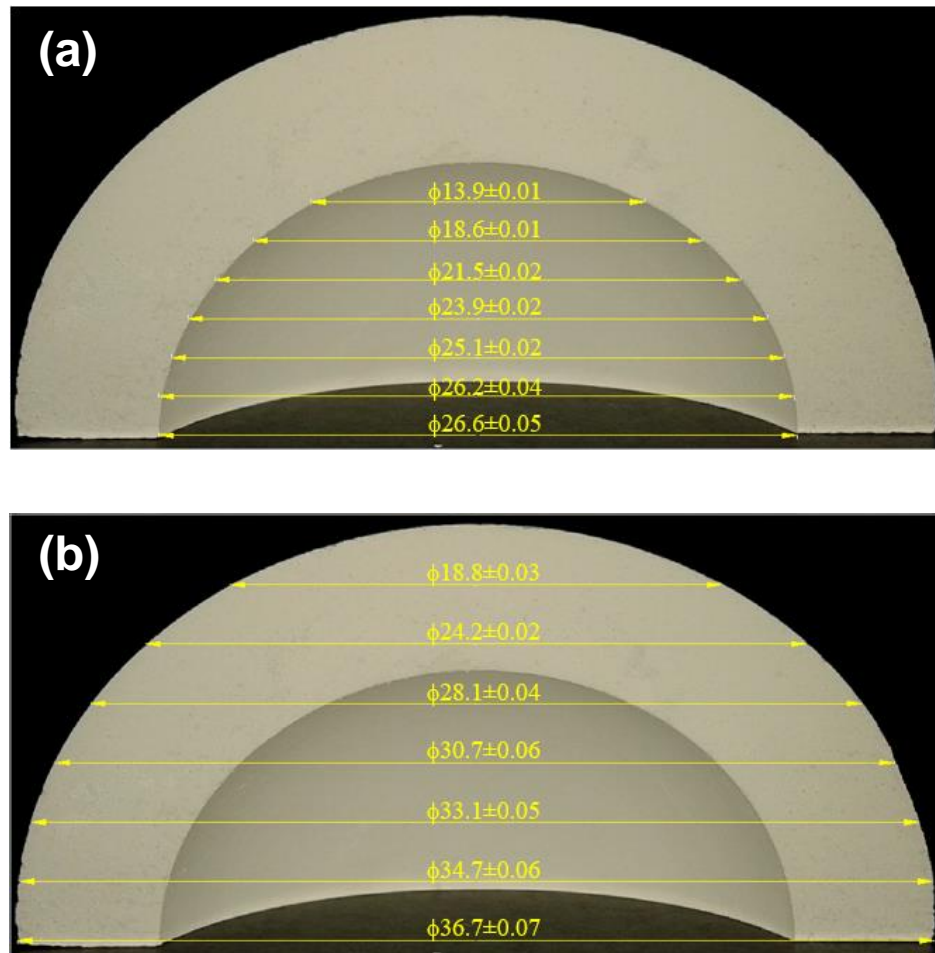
Cross sectional view of the acetabular socket and a dimensional analysis of articulating surface (a) and outer shell (b) diameter measured by the co-ordinate measuring machine (CMM).
